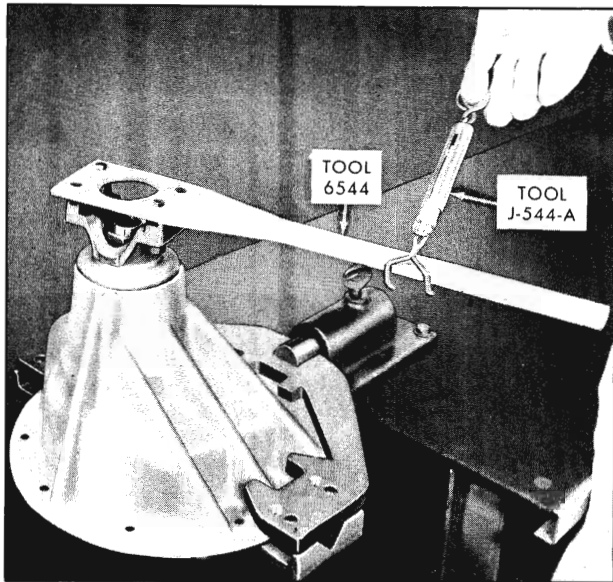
Measuring Bearing Preload With Spring Scale
